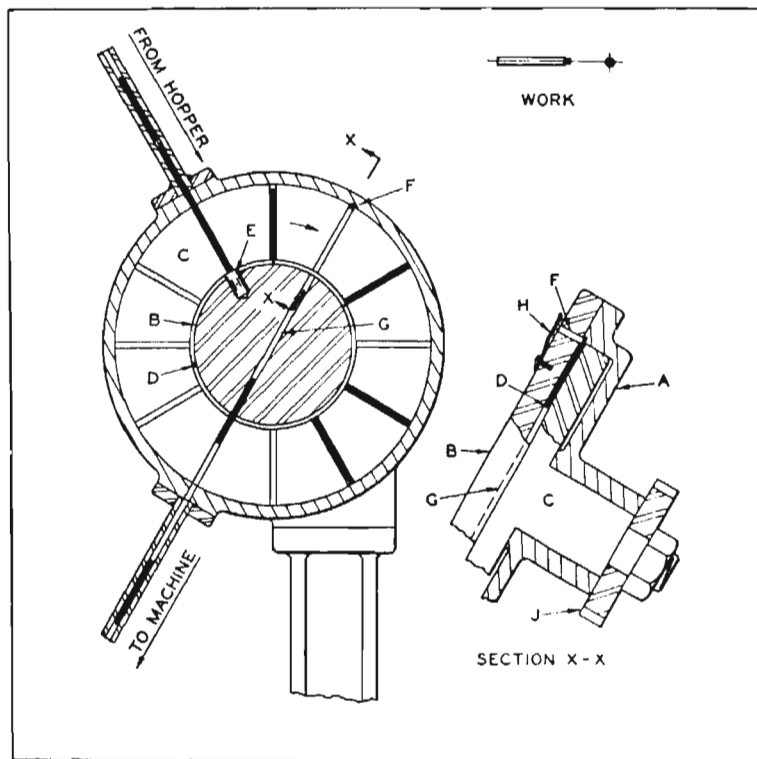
Spring-actuated Pin (*F*) Prevents Work Fed from a Hopper in the Incorrect Position from Being Transferred to a Machine.
